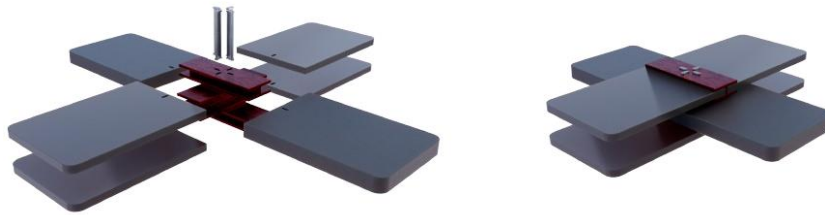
Concept model of a multi-layer rigid joint for a square geometry. An exploded view (left), and a perspective view (right).
